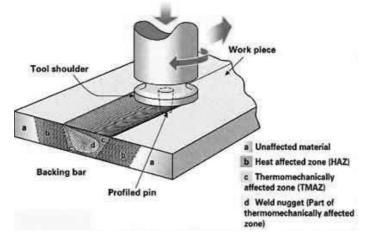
Basic Working Diagram of friction stir welding.
